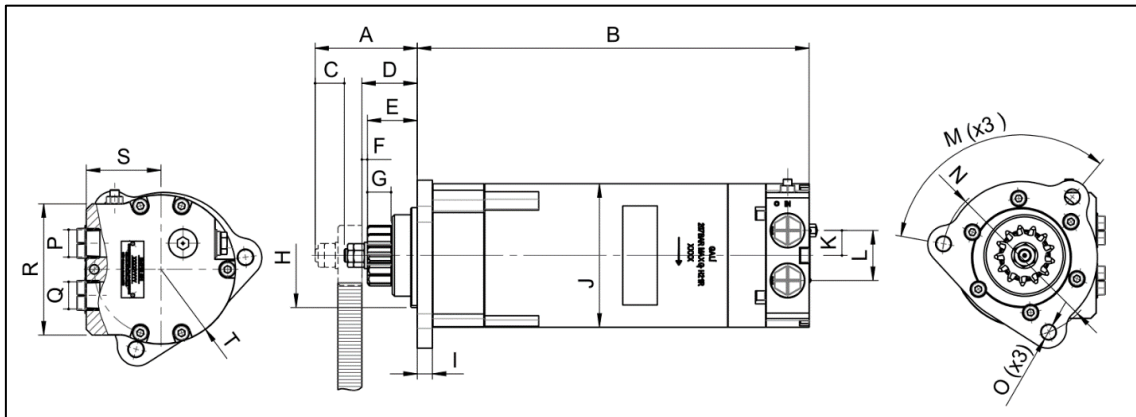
H21hydraulic starter dimensions. ⁽⁵⁾
